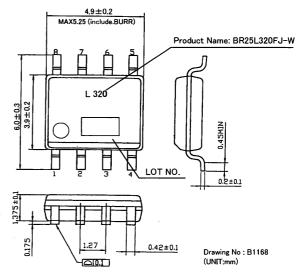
(b) PHYSICAL DIMENSION SOP-J8 (BR25L320FJ-W)
